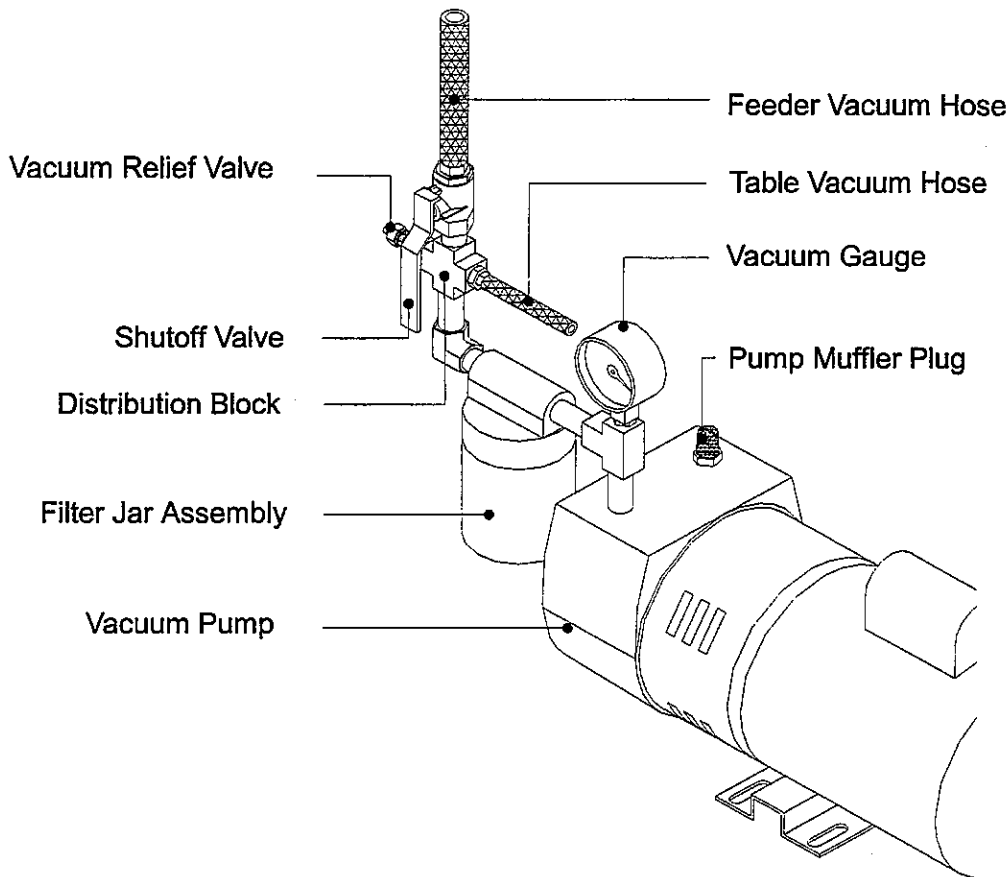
Vacuum Pump System illustrating vacuum relief valve, shutoff valve, filter jar assembly, vacuum gauge and hose locations.
